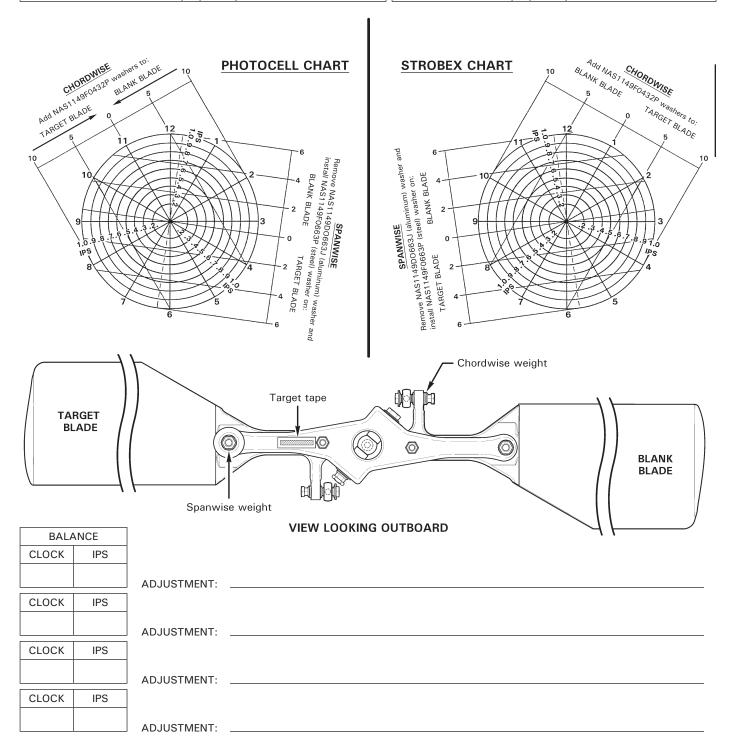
C008-9 TAIL ROTOR ASSEMBLY DYNAMIC BALANCE CHART
